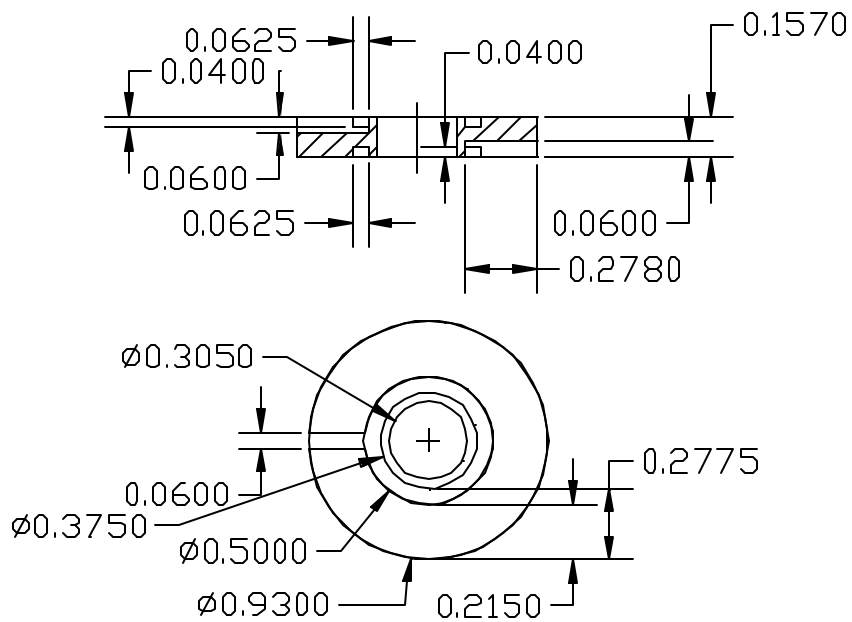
CAD drawings of the central Teflon part (all dimensions are in inches)
